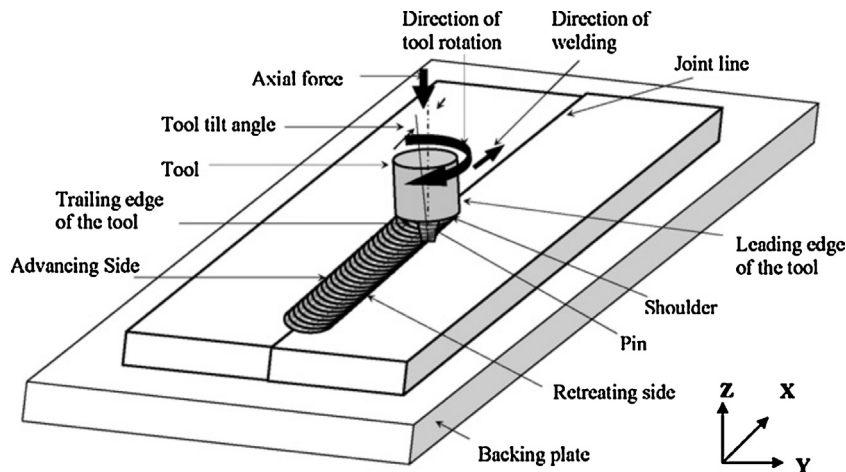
Schematic of friction-stir welding process [3].
